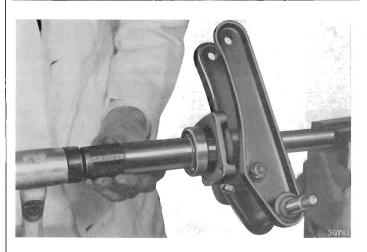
Using Churchill driver S4221A/6 to drift the ball race on to the shaft
